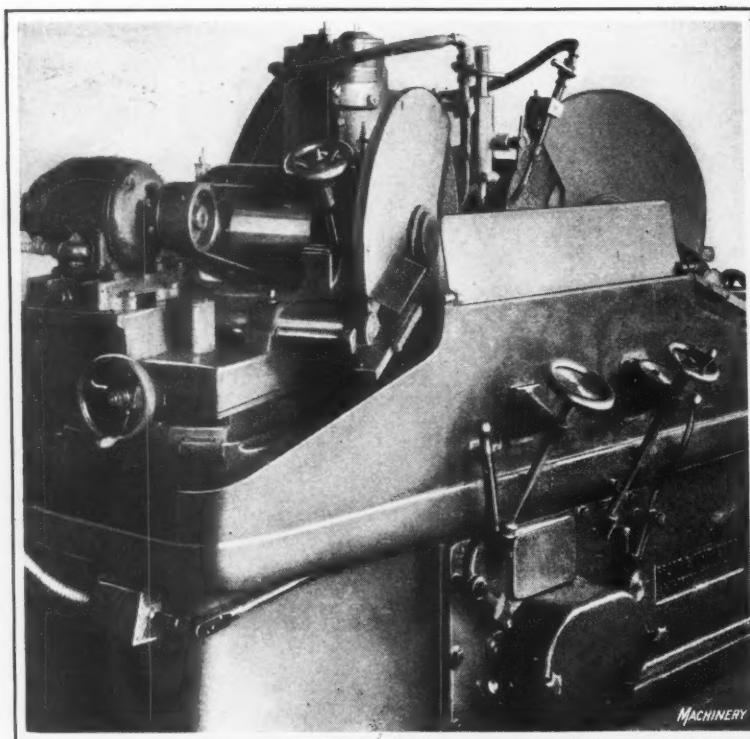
Two-wheel Gear Tooth Grinder of the Rotary Type
